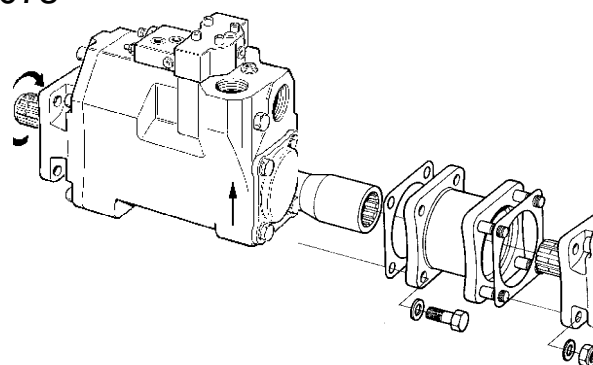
Adaptor kit (P/N 379 7795) for tandem coupling.
